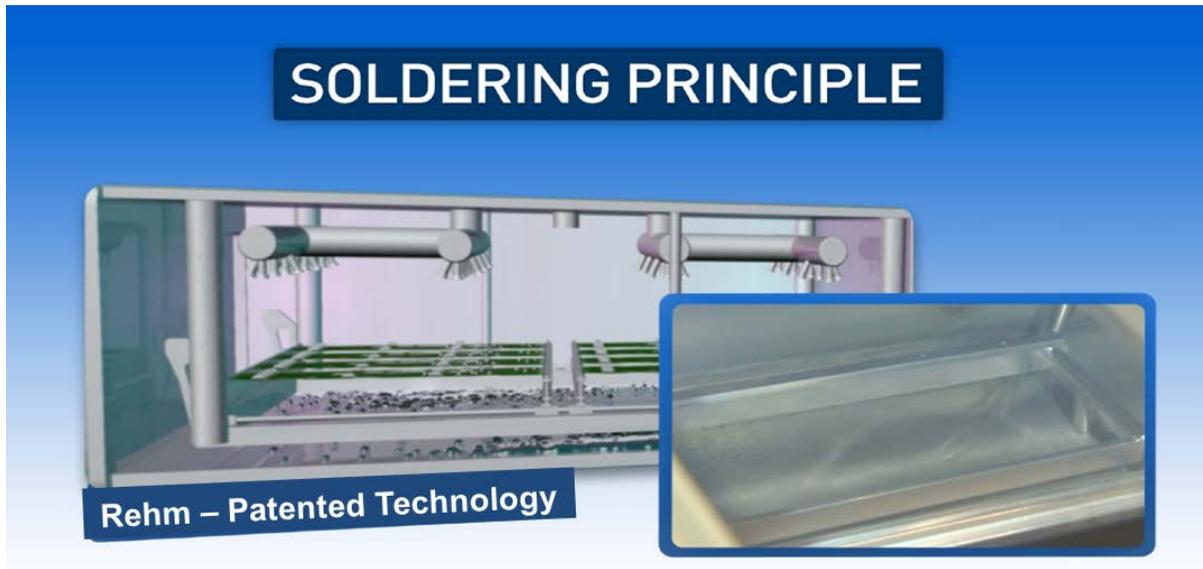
Process Chamber of the Condensox for Soldering of Stationary PCB Assemblies with Vacuum
